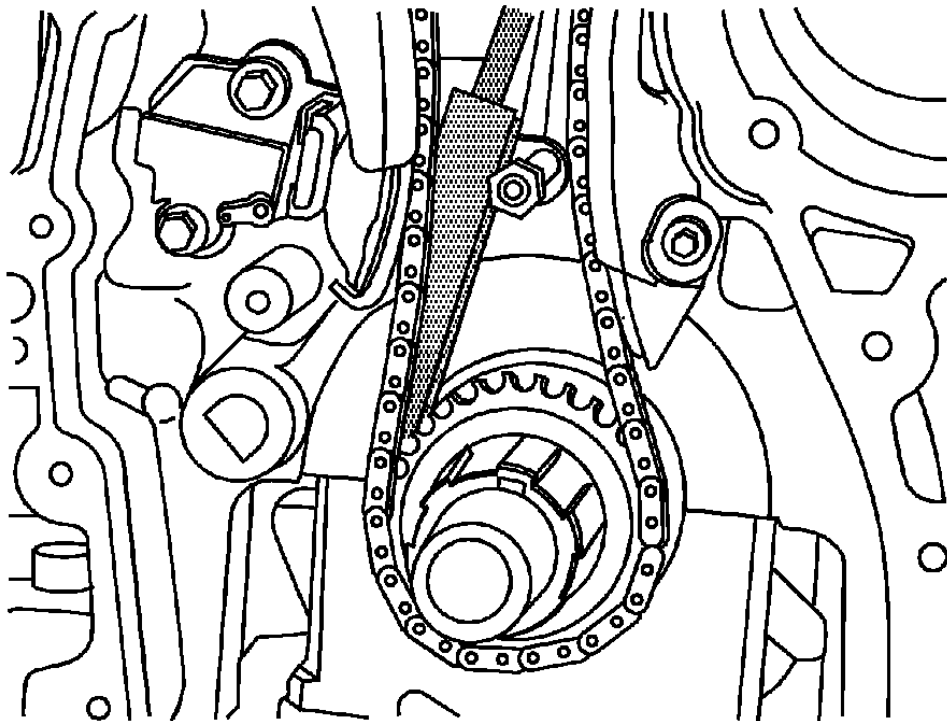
Ensuring Proper Placement Of Wedge Tool
